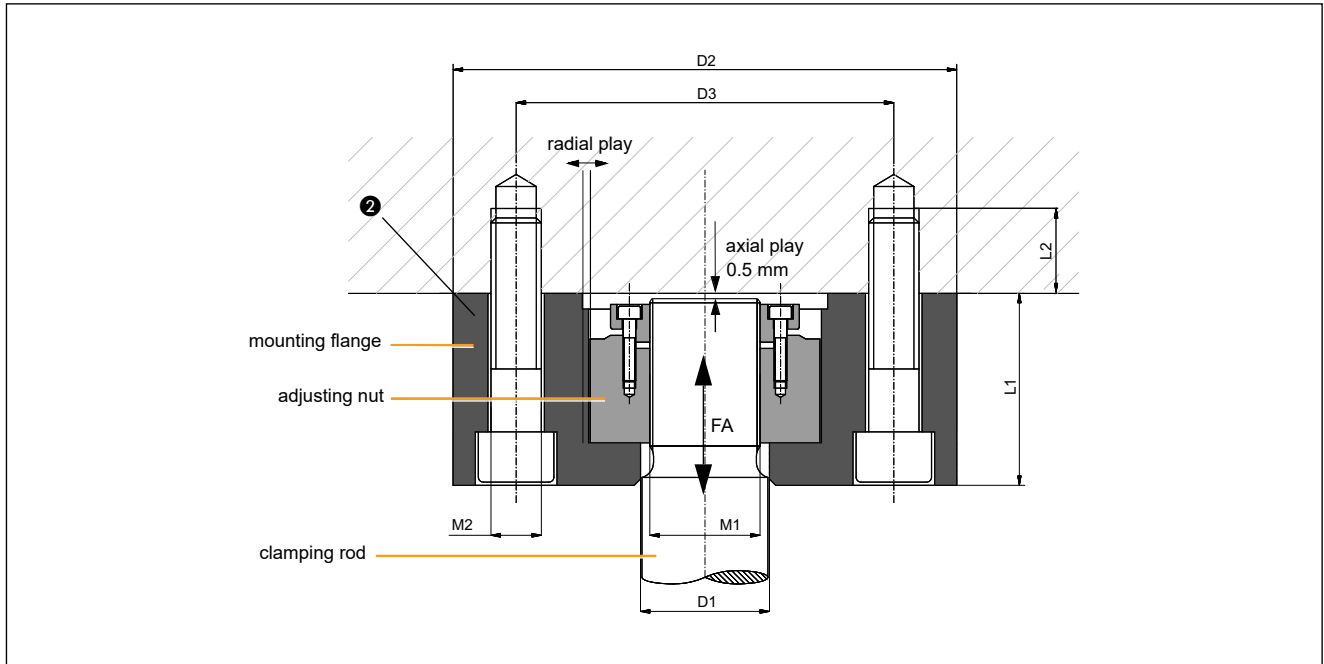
Dimensions of the rod attachment STB (download CAD files from [www.sitema.com](http://www.sitema.com))
